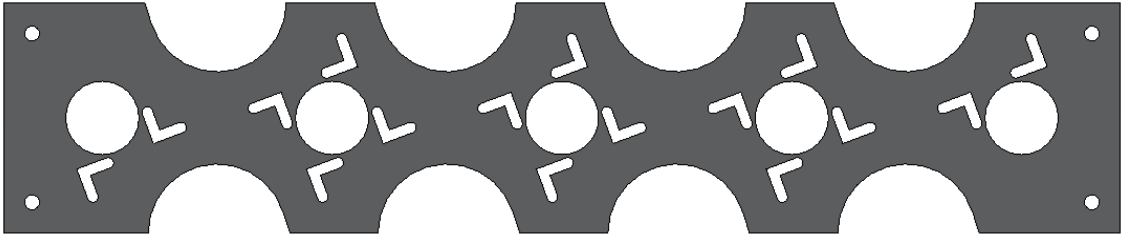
The aluminum bracket that holds the scintillator bars in place. The angle cut-outs are through holes for the aluminum rails that support the scintillator, while the circular holes in the center are through holes for the ^3He counters.
